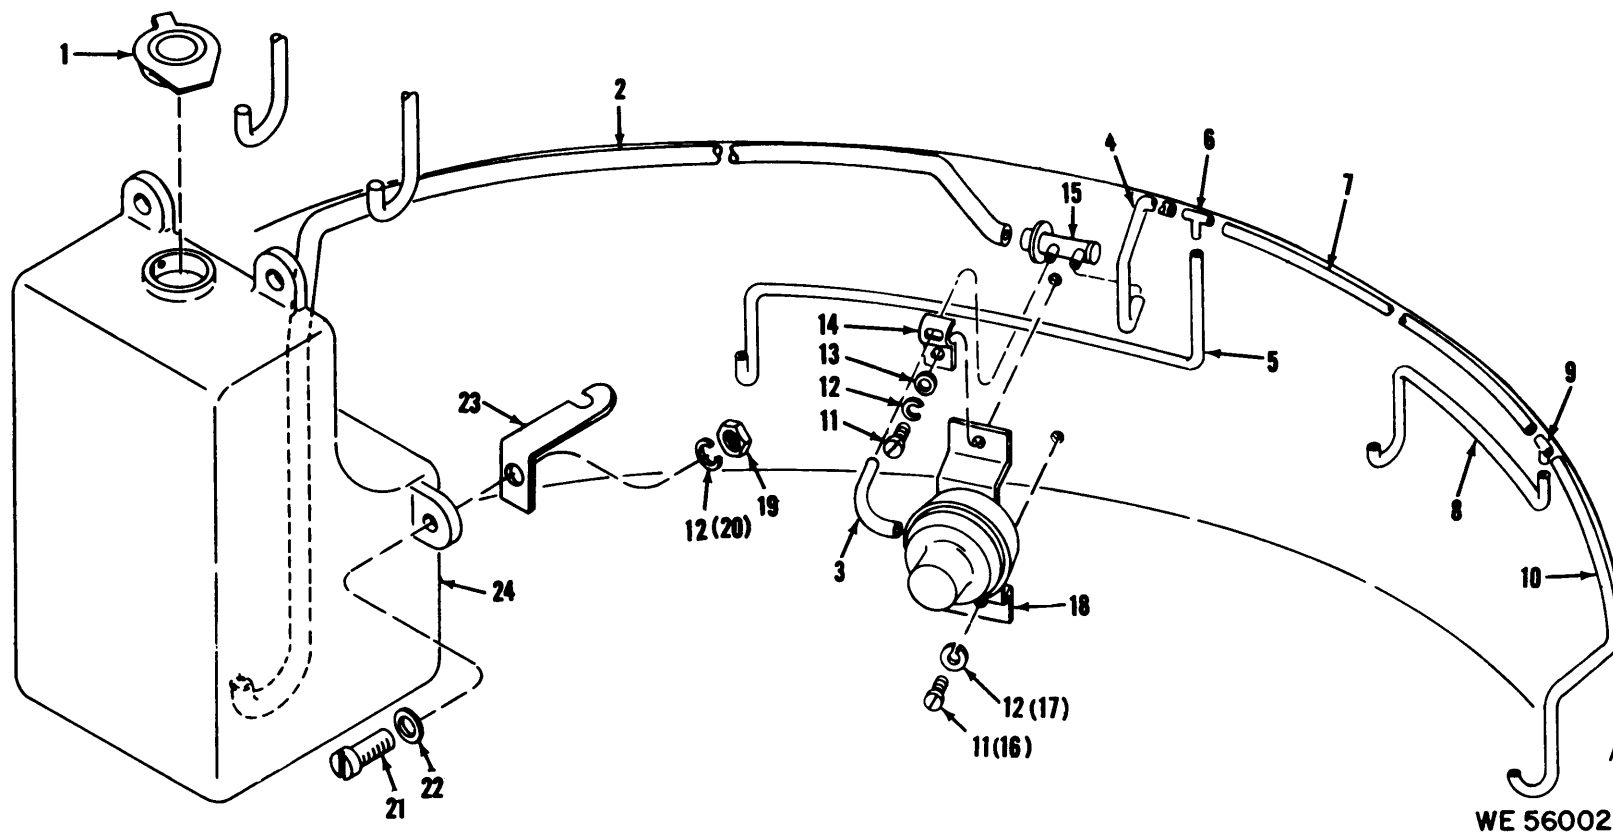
Washer, pump, and reservoir assembly 8589793 - exploded view.
